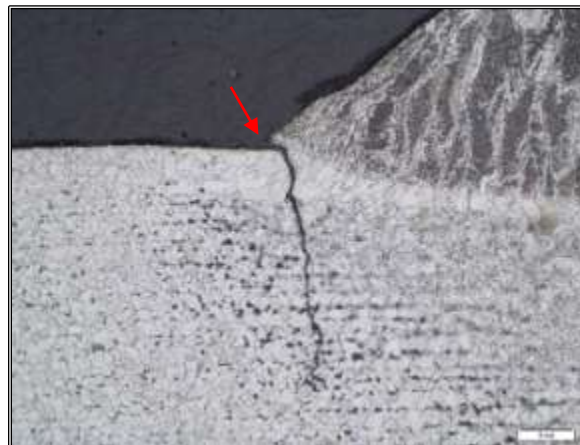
Fatigue crack which initiated at the toe of a weld with overlap
